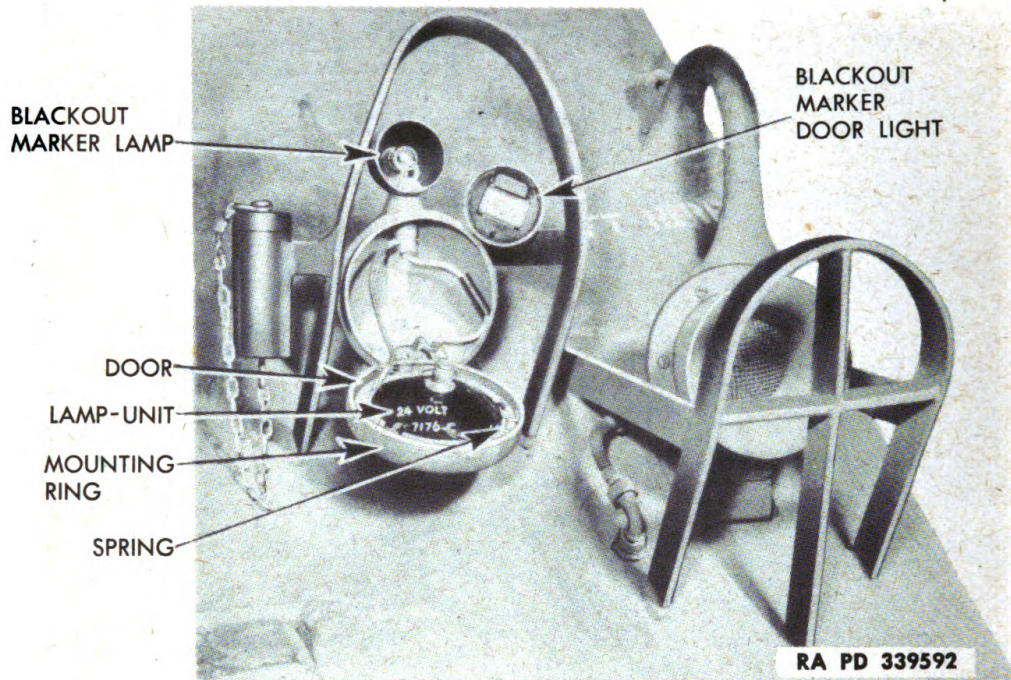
Headlight and Blackout Marker Light — Doors Removed
